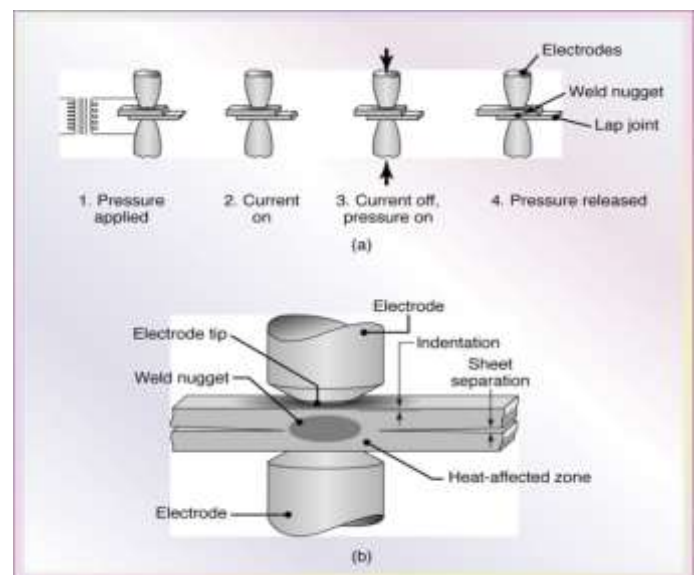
Schematic diagram of Resistance Welding Process
